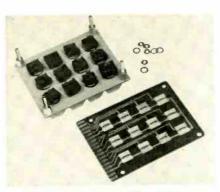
PC PATTERN for a keyboard. Use extreme care when drilling holes for keystems.
